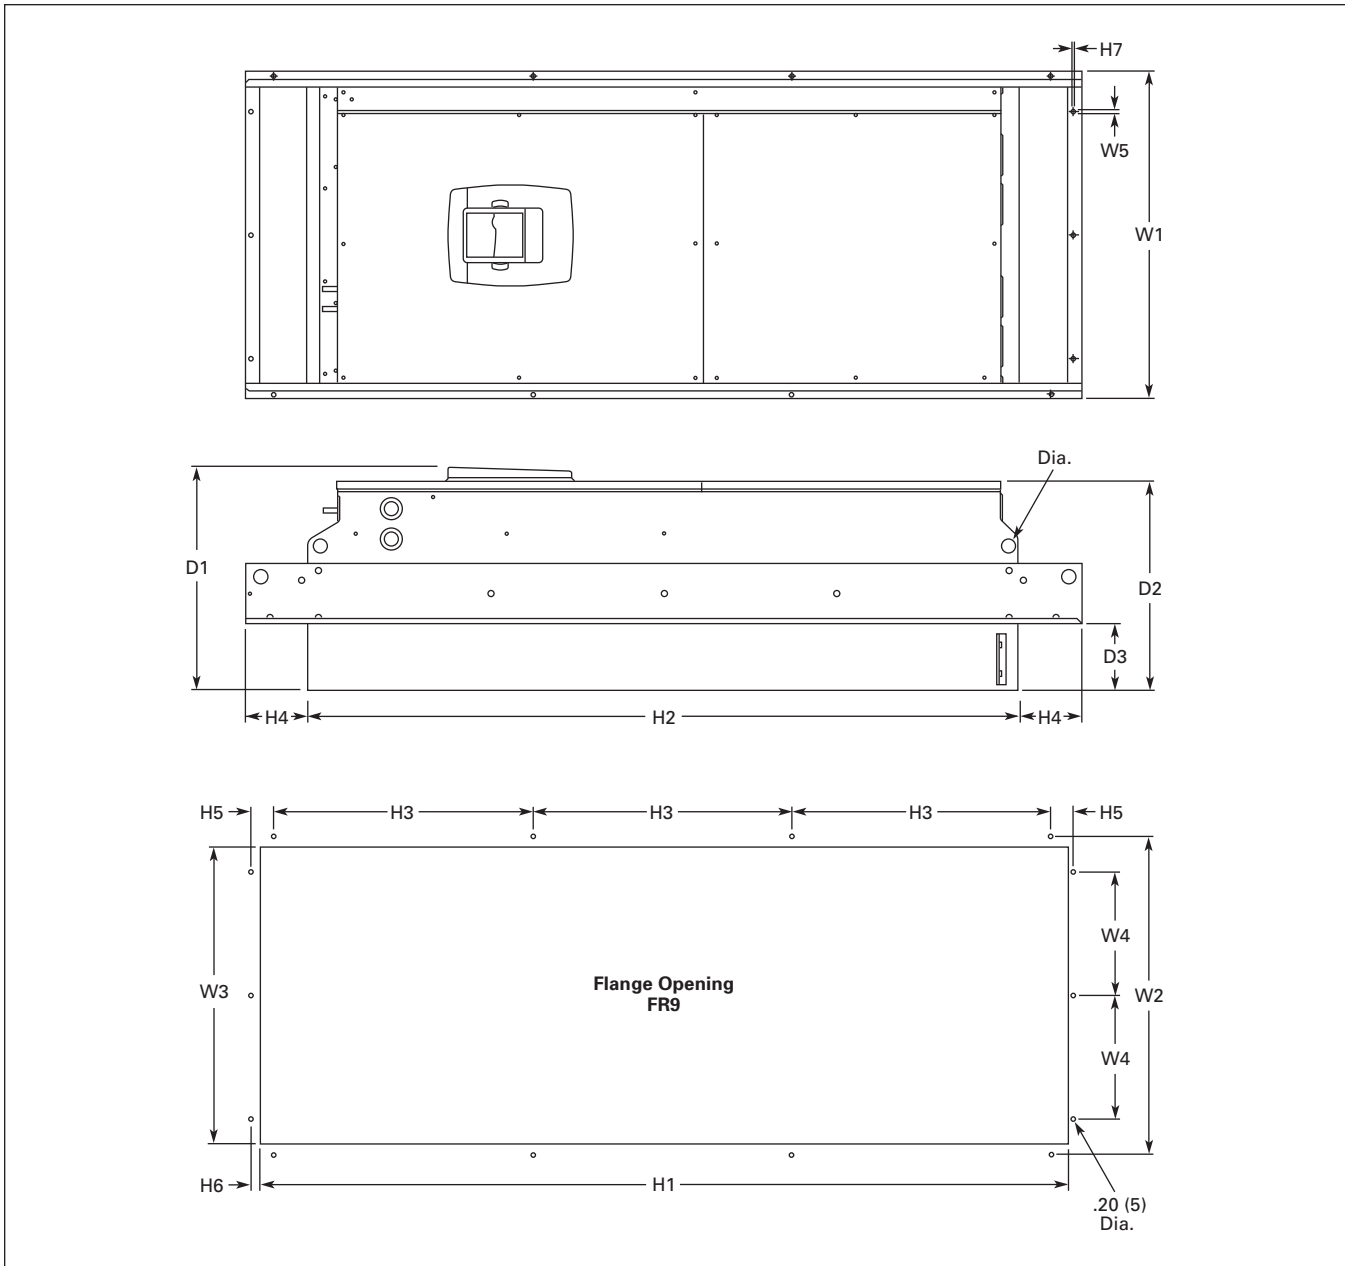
VSD Series Open Drive Dimensions, TYPE 1 and TYPE 12 FR9 with Flange Kit
